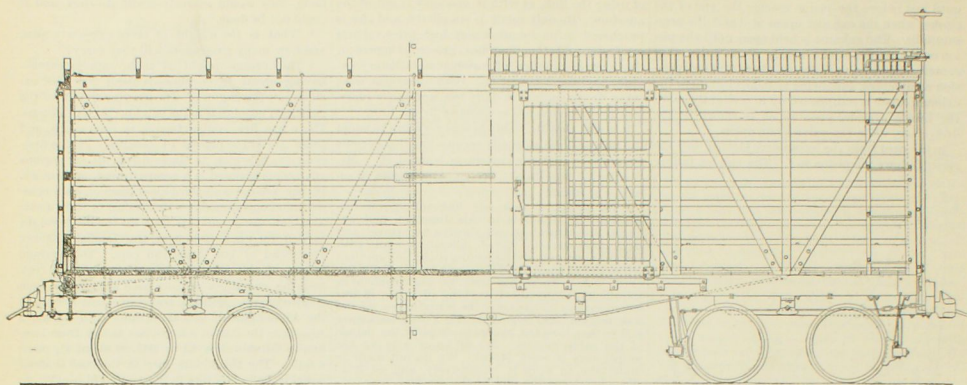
Section at A. B. (Fig. 4) and Side Elevation.
